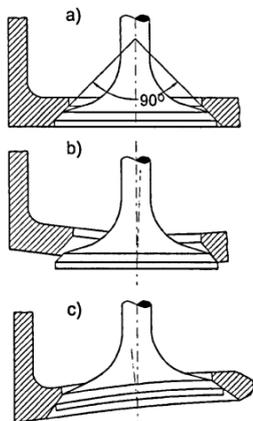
Deformation of cylinder head bottom and valve due to combustion pressure (a) valve seated in plane cylinder head bottom; (b) downward bottom deflection, valve making one sided contact; (c) upward bottom deflection and bending of valve disc under gas pressure (3)
